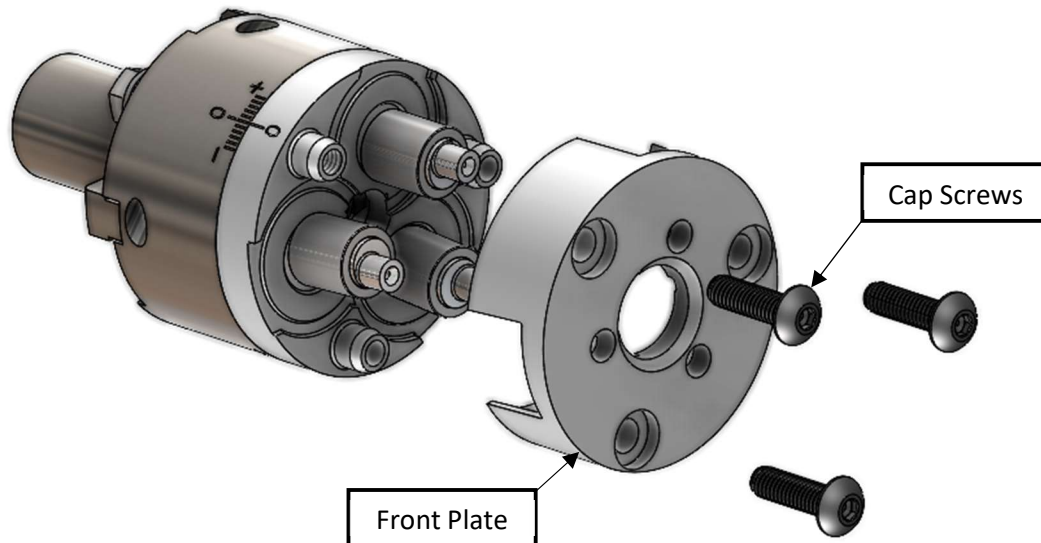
189 ER-01 Attachment with Front Plate Removed
